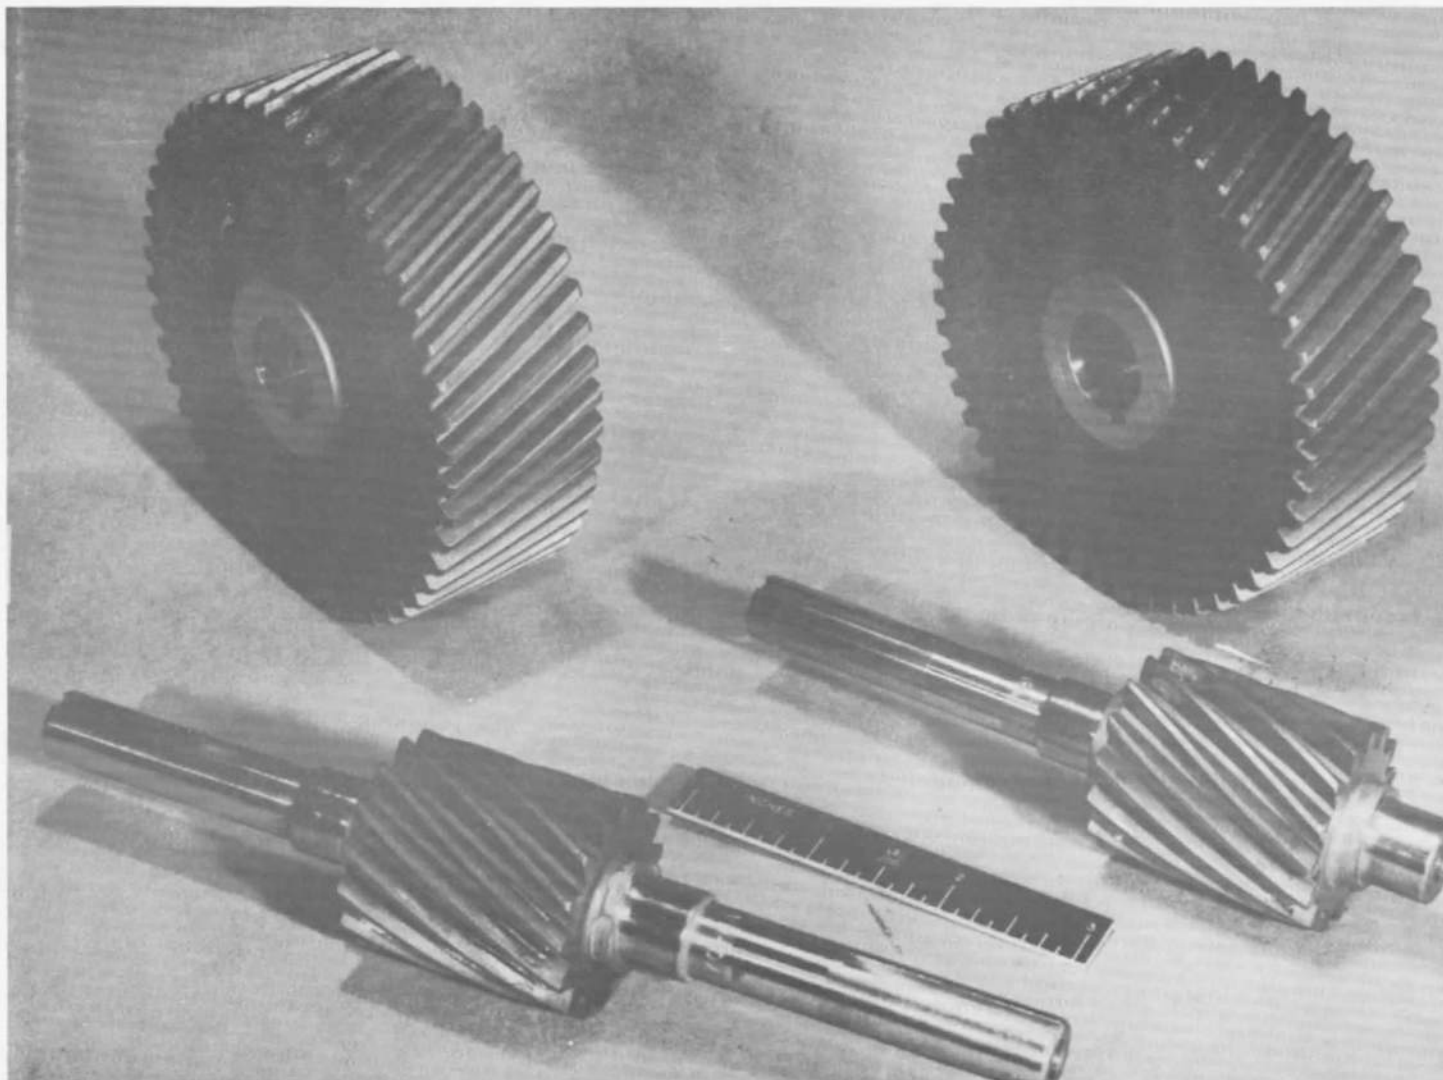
Gear Tests – Nos. 1 and 2 – the light areas on the tooth surfaces adjacent to the gear faces indicate depletion of lubricant (Lub: MoS_2 + Epoxy Binder).
